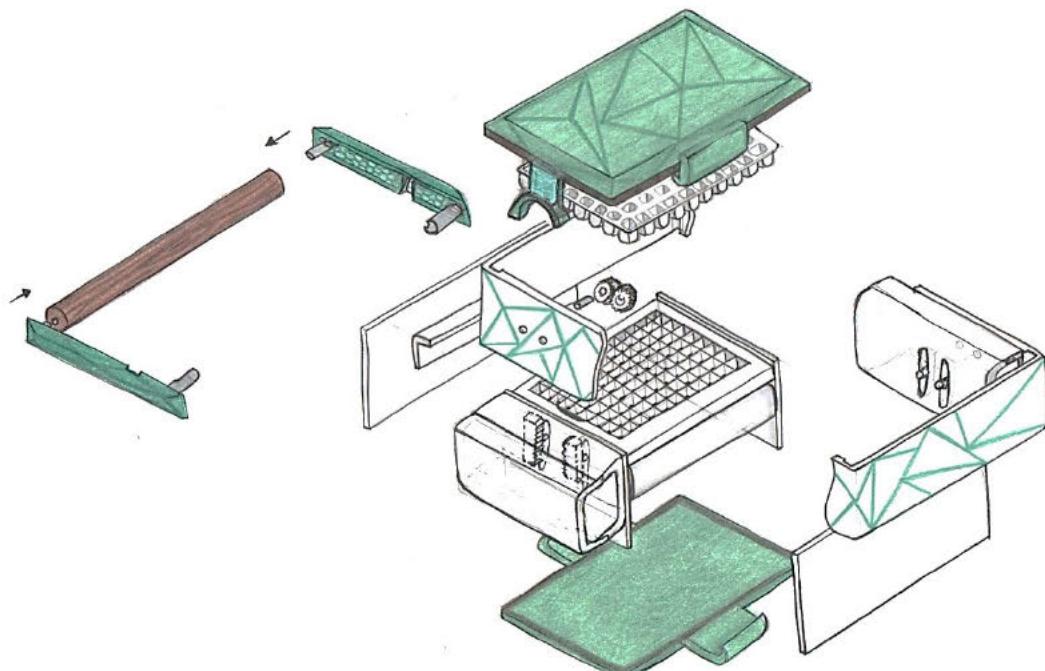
, EXPLODED VIEW MASS PRODUCT
